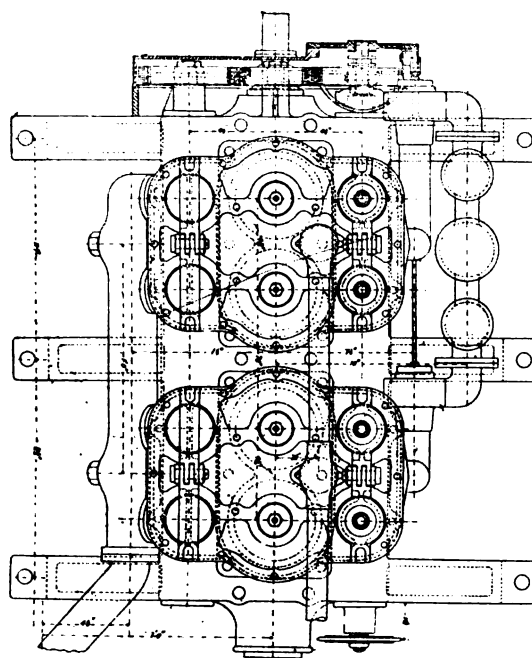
PLAN OF HUMBER 20-H.P. FOUR-CYLINDER MOTOR.
